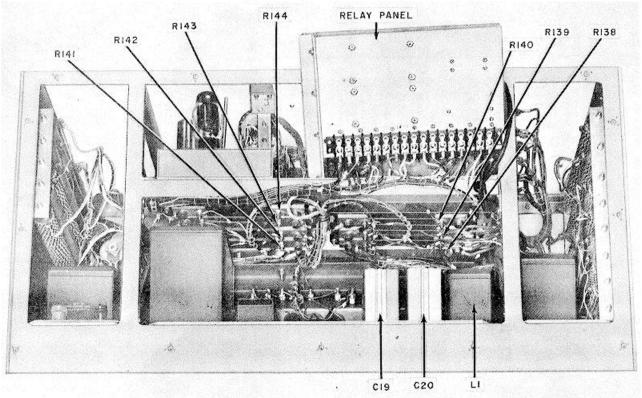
Meter Test Set TS-682A/GSM-1, rear view, rear panel removed.
